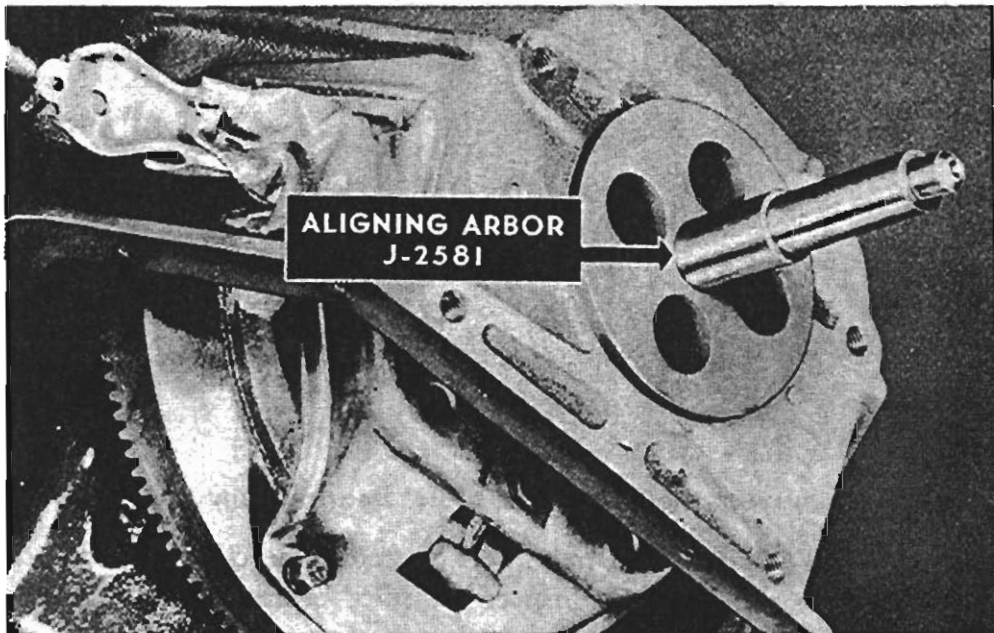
Insert Aligning Arbor Through Driven Plate, into Pilot Bearing as Shown.
